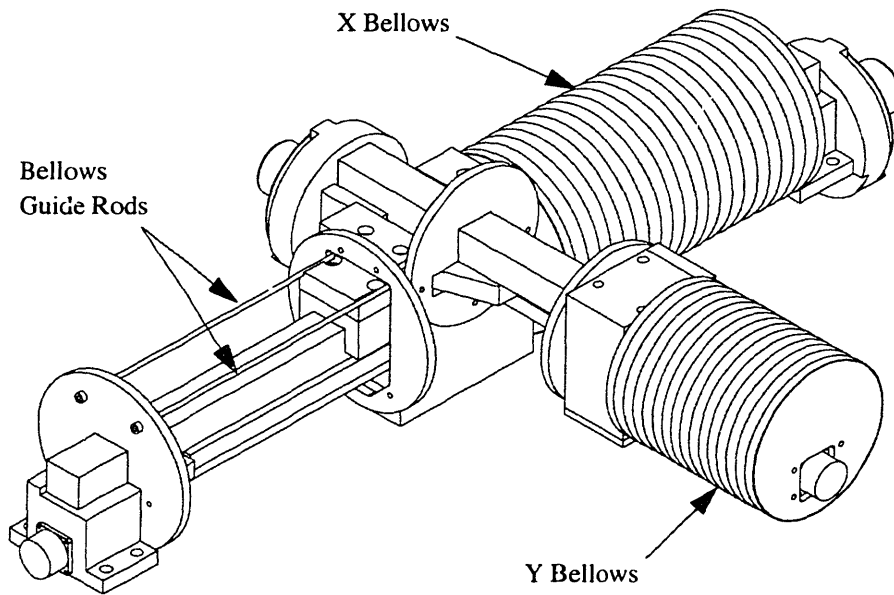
Assembly of the Small Waterjet Showing Bellows and Internal Guide Rods
